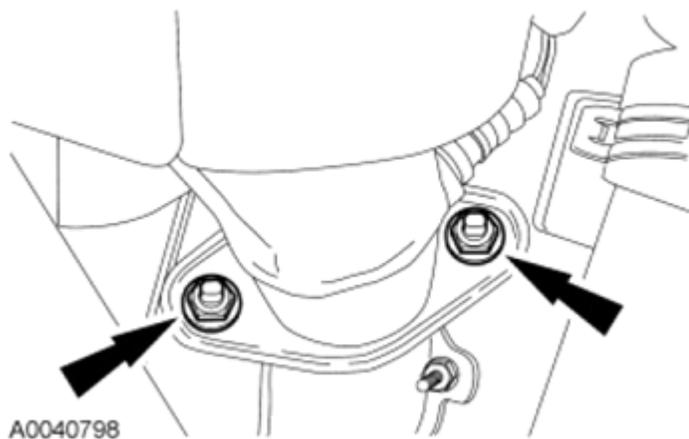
Locating Exhaust Manifold-To-Catalytic Converter Nuts
